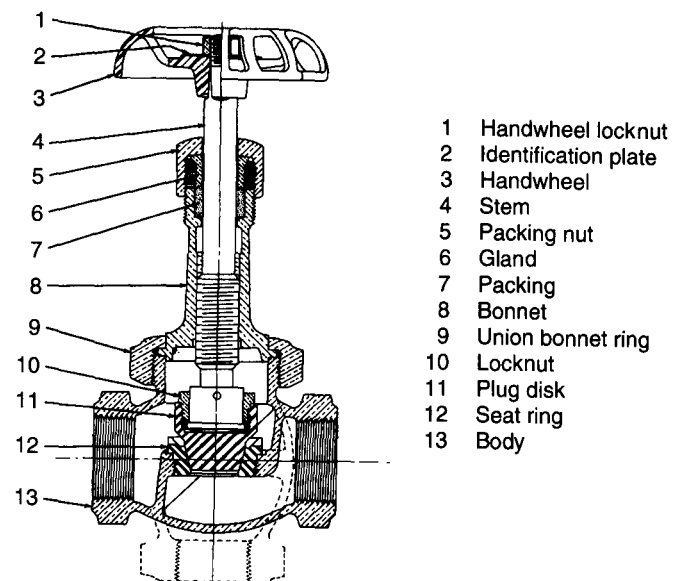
Plug disk globe valve. Courtesy Crane Company.
